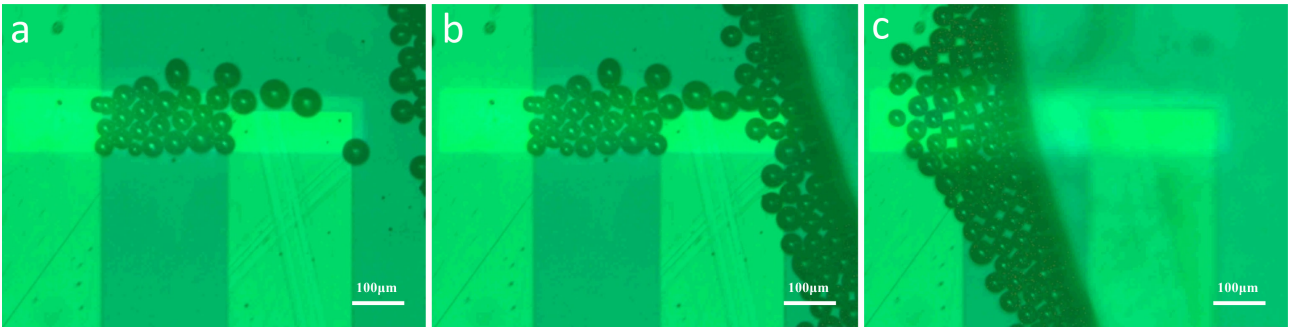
Natural evaporation formed water wave swept away the assembled solder beads.
